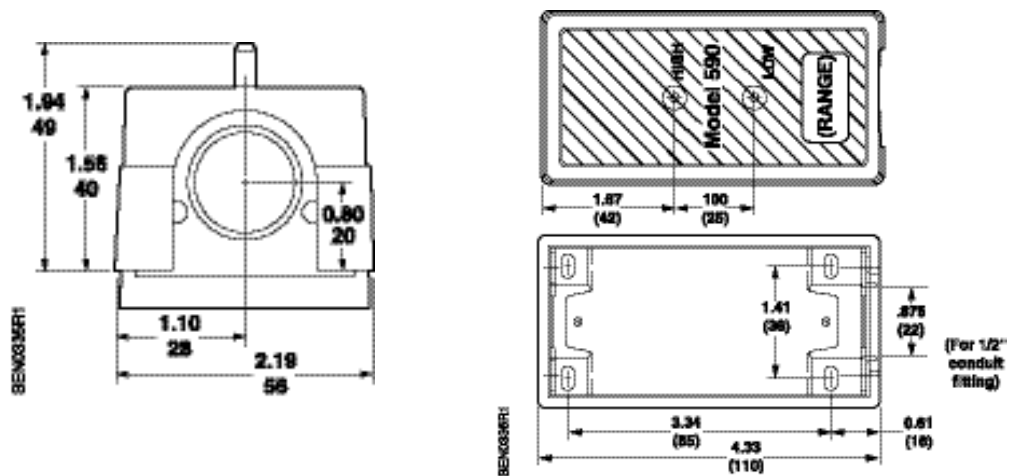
Conduit Enclosure Dimensions in Inches (Millimeters).
